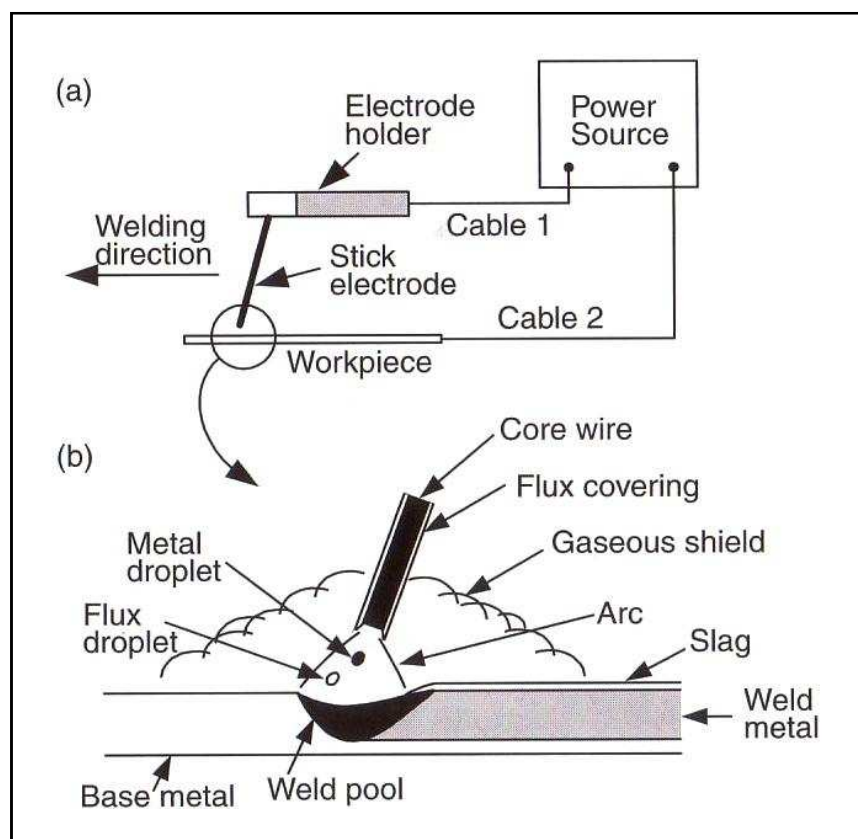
Shielded metal arc welding (a) overall process; (b) welding area [88]
